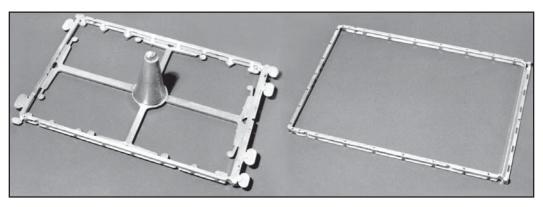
Photo on left shows untrimmed zinc die casting as it comes from the die. At right, the same casting after trimming.
